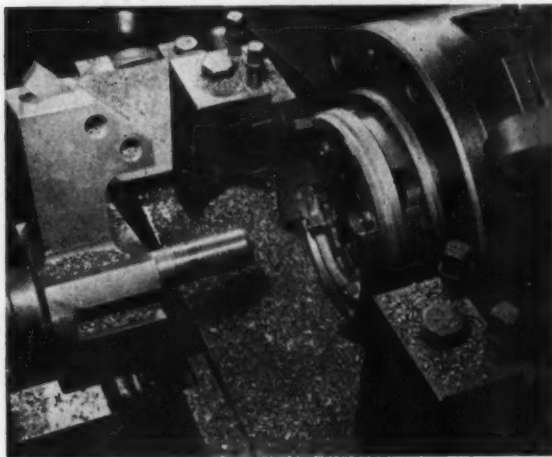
Setup for machining two cast iron typebar segments in the air operated chuck of a Warner & Swasey turret lathe. A tool on far cross-slide makes an undercut wire groove after a back tool cuts the slot itself.
